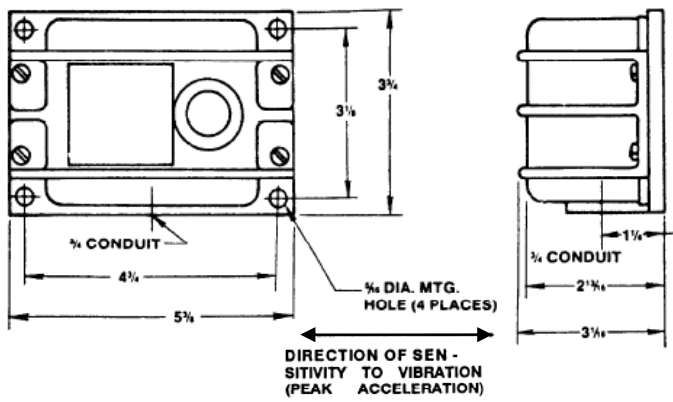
Mounting Dimensions and External wiring for the Vibraswitch Model 376A
